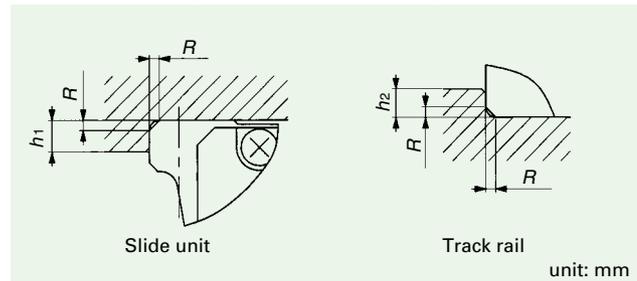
Relieved fillet at the corner of the mating reference mounting surfaces
